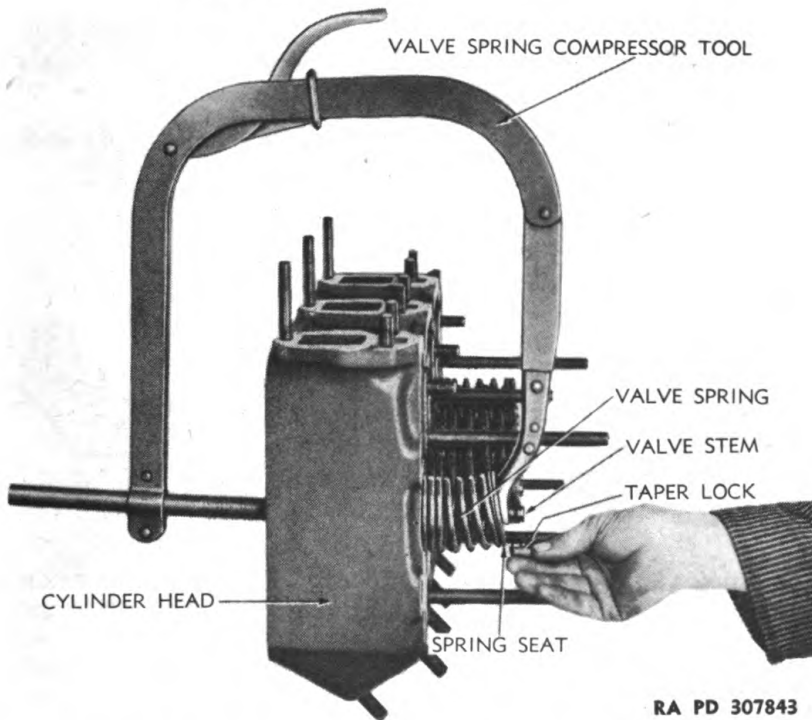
Removing Valve Taper Locks, With Tool 41-L-1408
